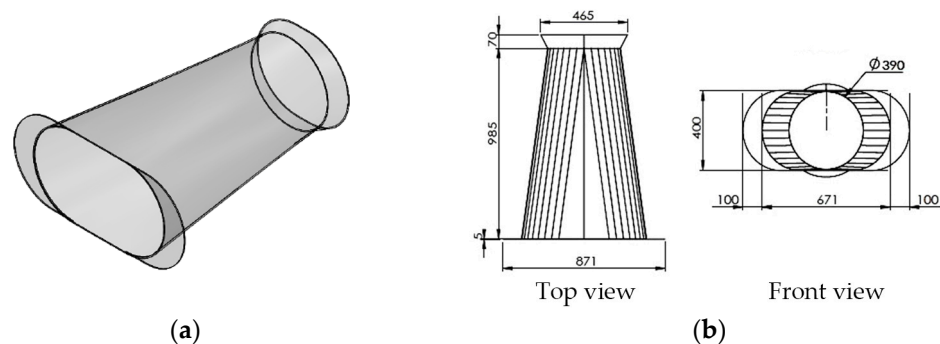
Diffuser/collective chamber. (a) Three-dimensional representation; (b) drawing view.
